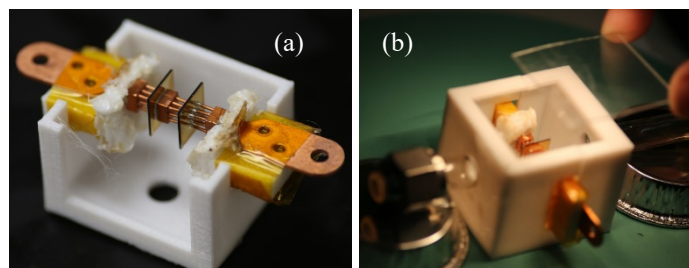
Images of the housing assembly (a) depicts the central structure placement in the additively manufactured housing (b) Placement of the clear window after box was assembled and fluid ports attached.
